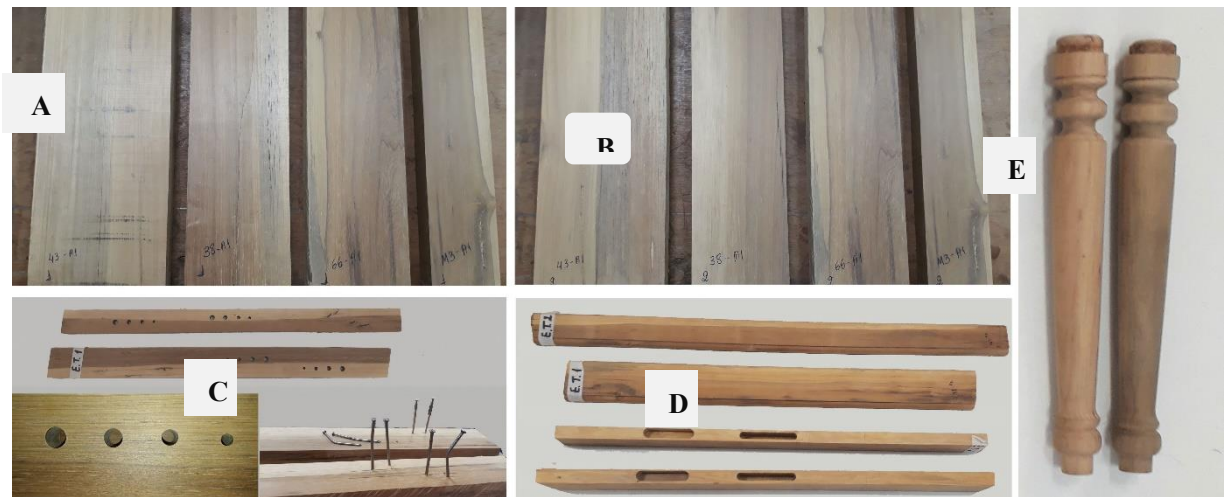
(A) Planing; (B) sanding; (C) Drill and nail drilling; (D) Side Tear and Top Frame; (E) Lathe.
